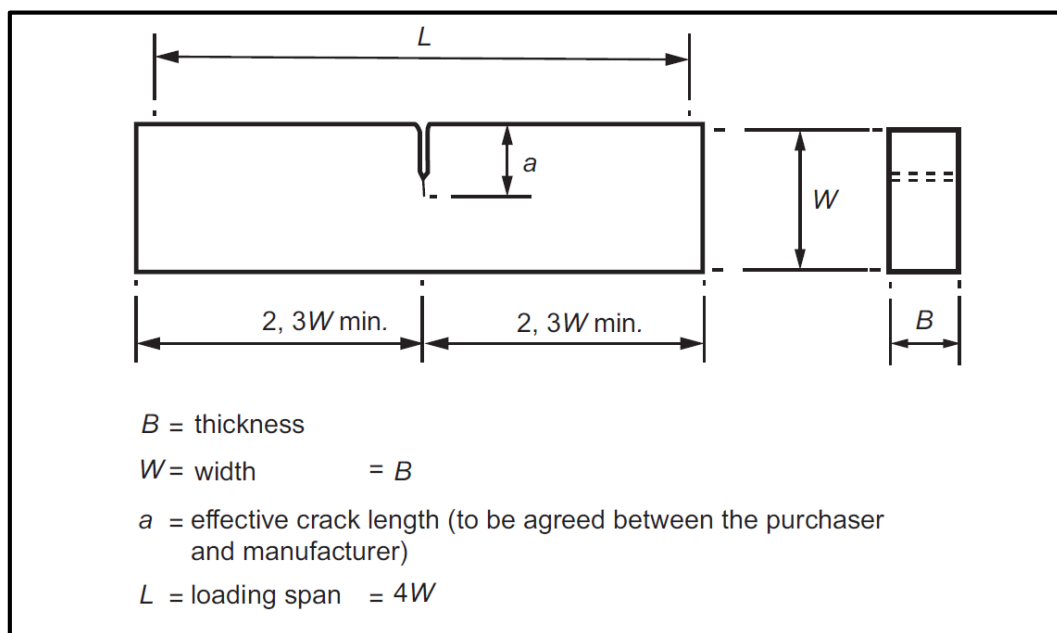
6 Outline dimensions of the subsidiary specimen (LR)
